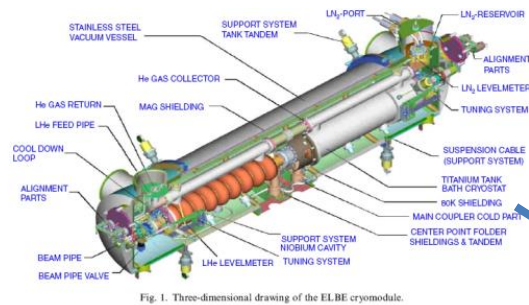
Three-dimensional drawing of the ELBE cryomodule.
